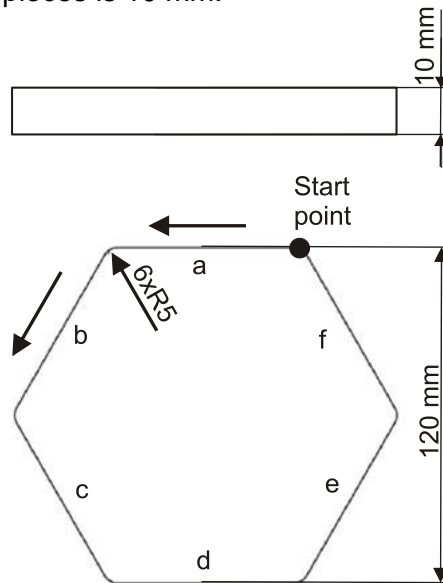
Design of cutting pieces and order of cutting for established process parameters
